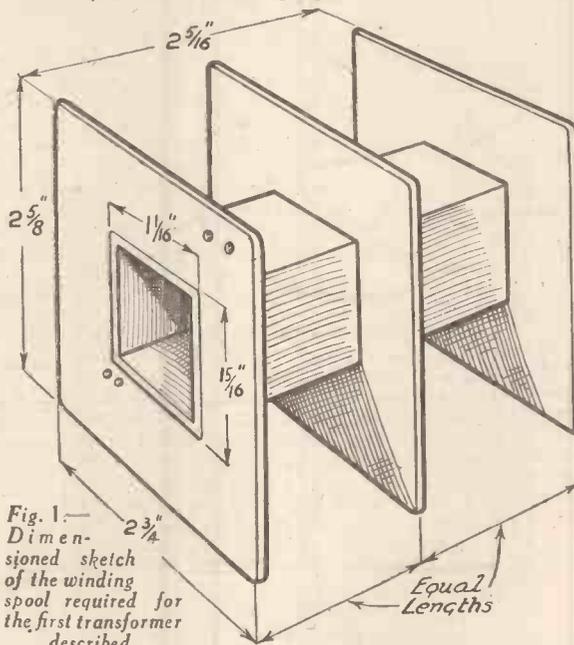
Dimensioned sketch of the winding spool required for the first transformer described.
